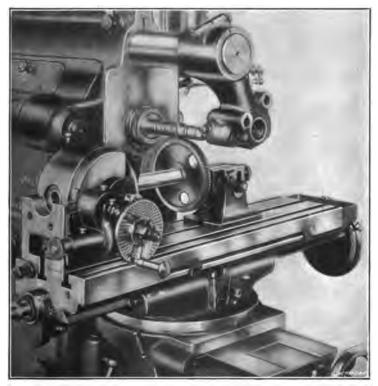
Gashing a Worm-wheel in a Universal Milling Machine
